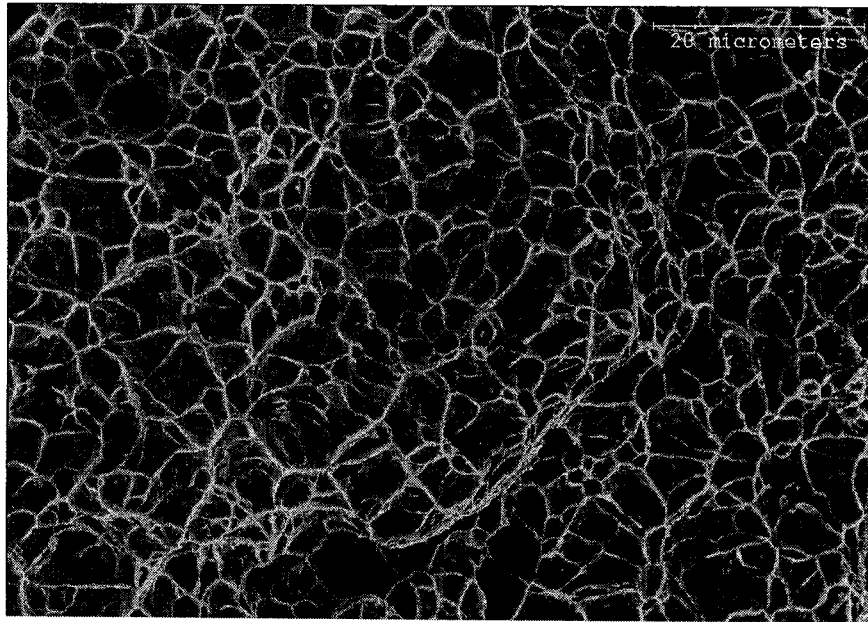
Elongated Microvoids on Fracture Surface of Test Specimen T28-1
